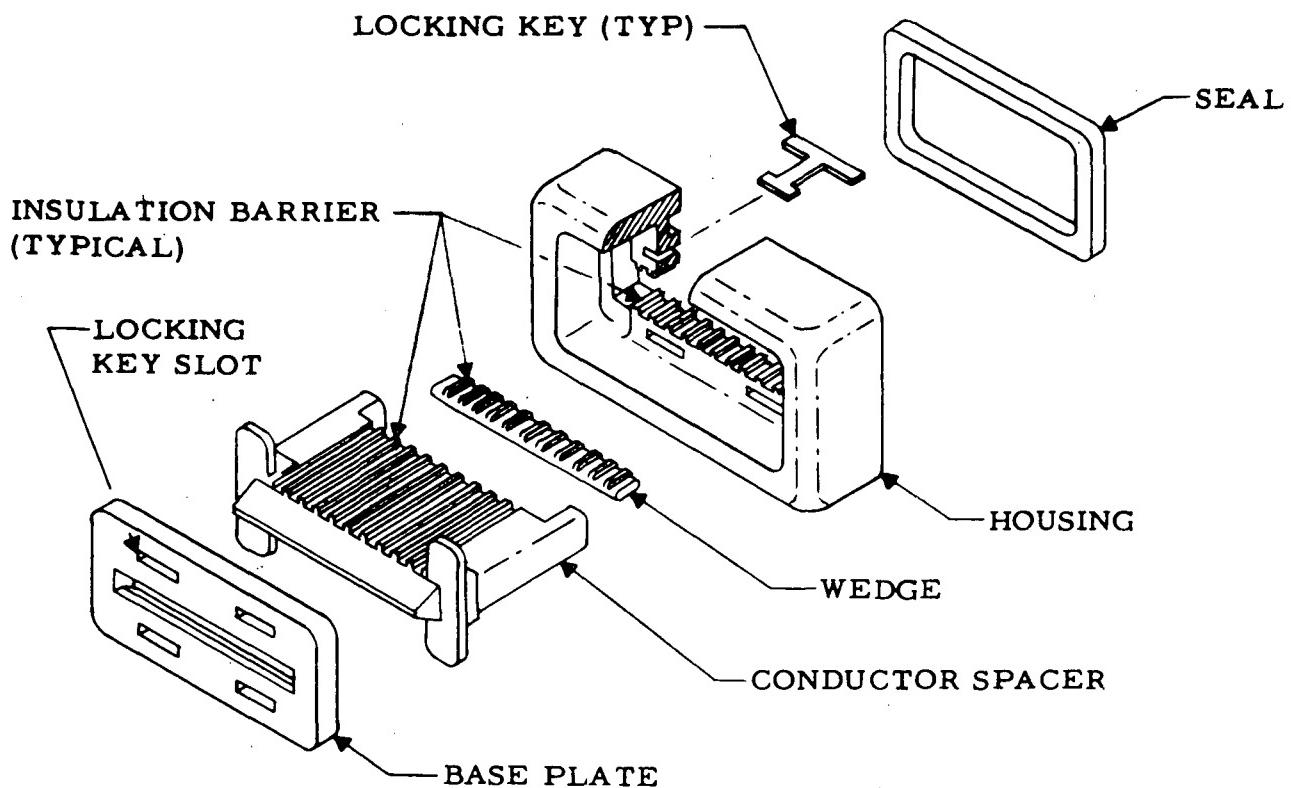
TYPICAL PREMOLDED RECTANGULAR PLUG PARTS
